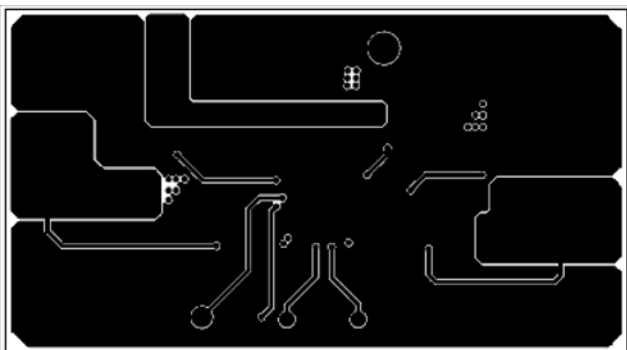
ISL6445EVAL3Z - BOTTOM LAYER (SOLDER SIDE)
